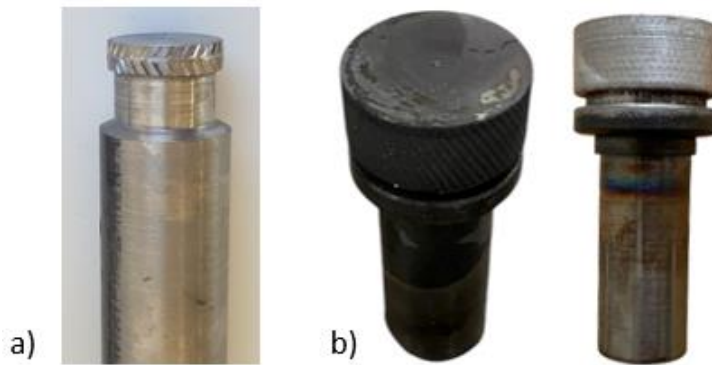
Tool used for FRAM tests: a) pre-optimized;
